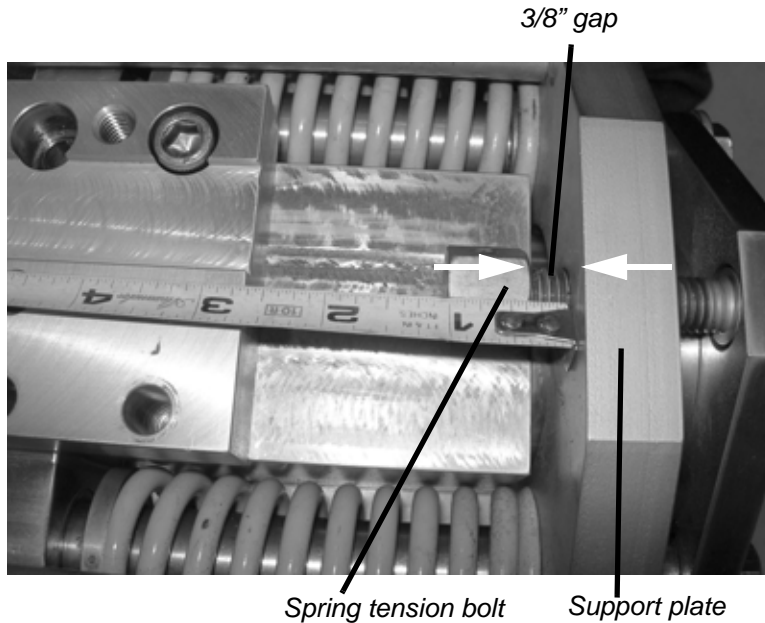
Set the spring tension bolt to a 3/8" gap from the support plate.
